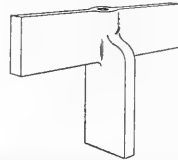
Device for Breaking Whirlpool in Jacketed Hot Well. To Be Inserted in Discharge Opening.
